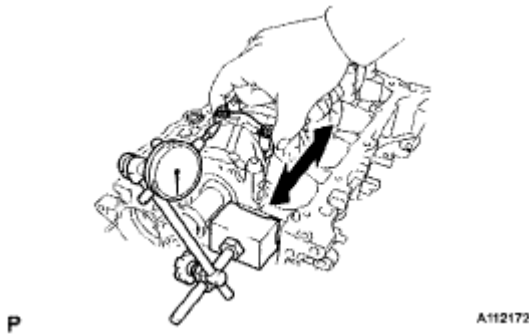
Inspecting Connecting Rod Thrust Clearance
